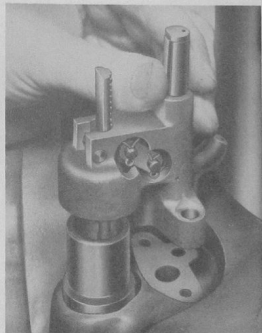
Installing Lubricating Valve & Offset Control to Barrel
